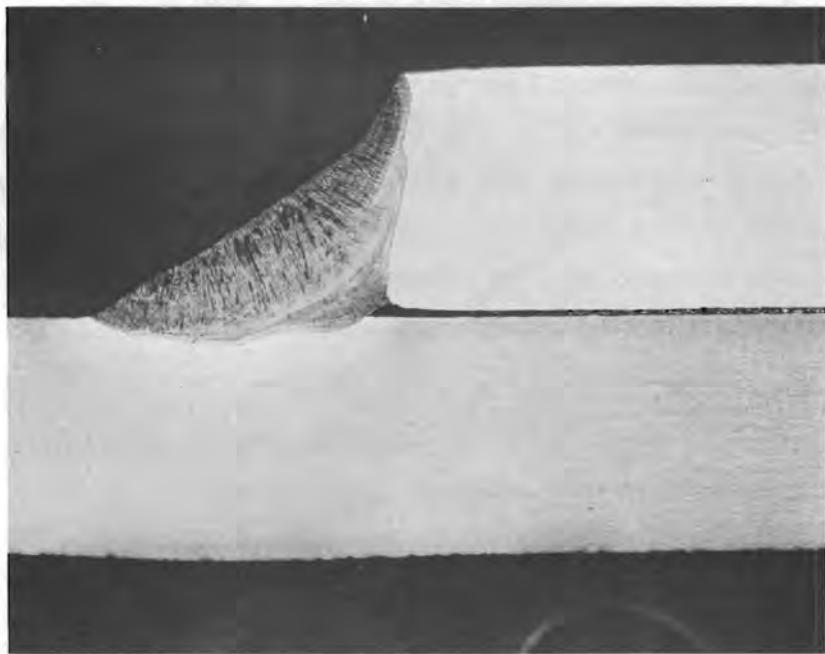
A. View of Weld Area (6.3X) - 304 Stainless-Steel Rack Weld (Neg. No. 4P1111B)
